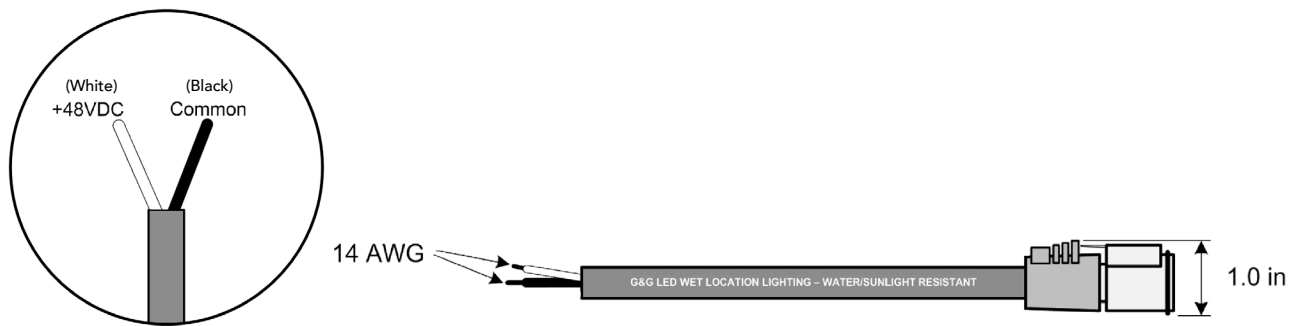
and 7.2: Leader Cable Dimensions and Wiring
